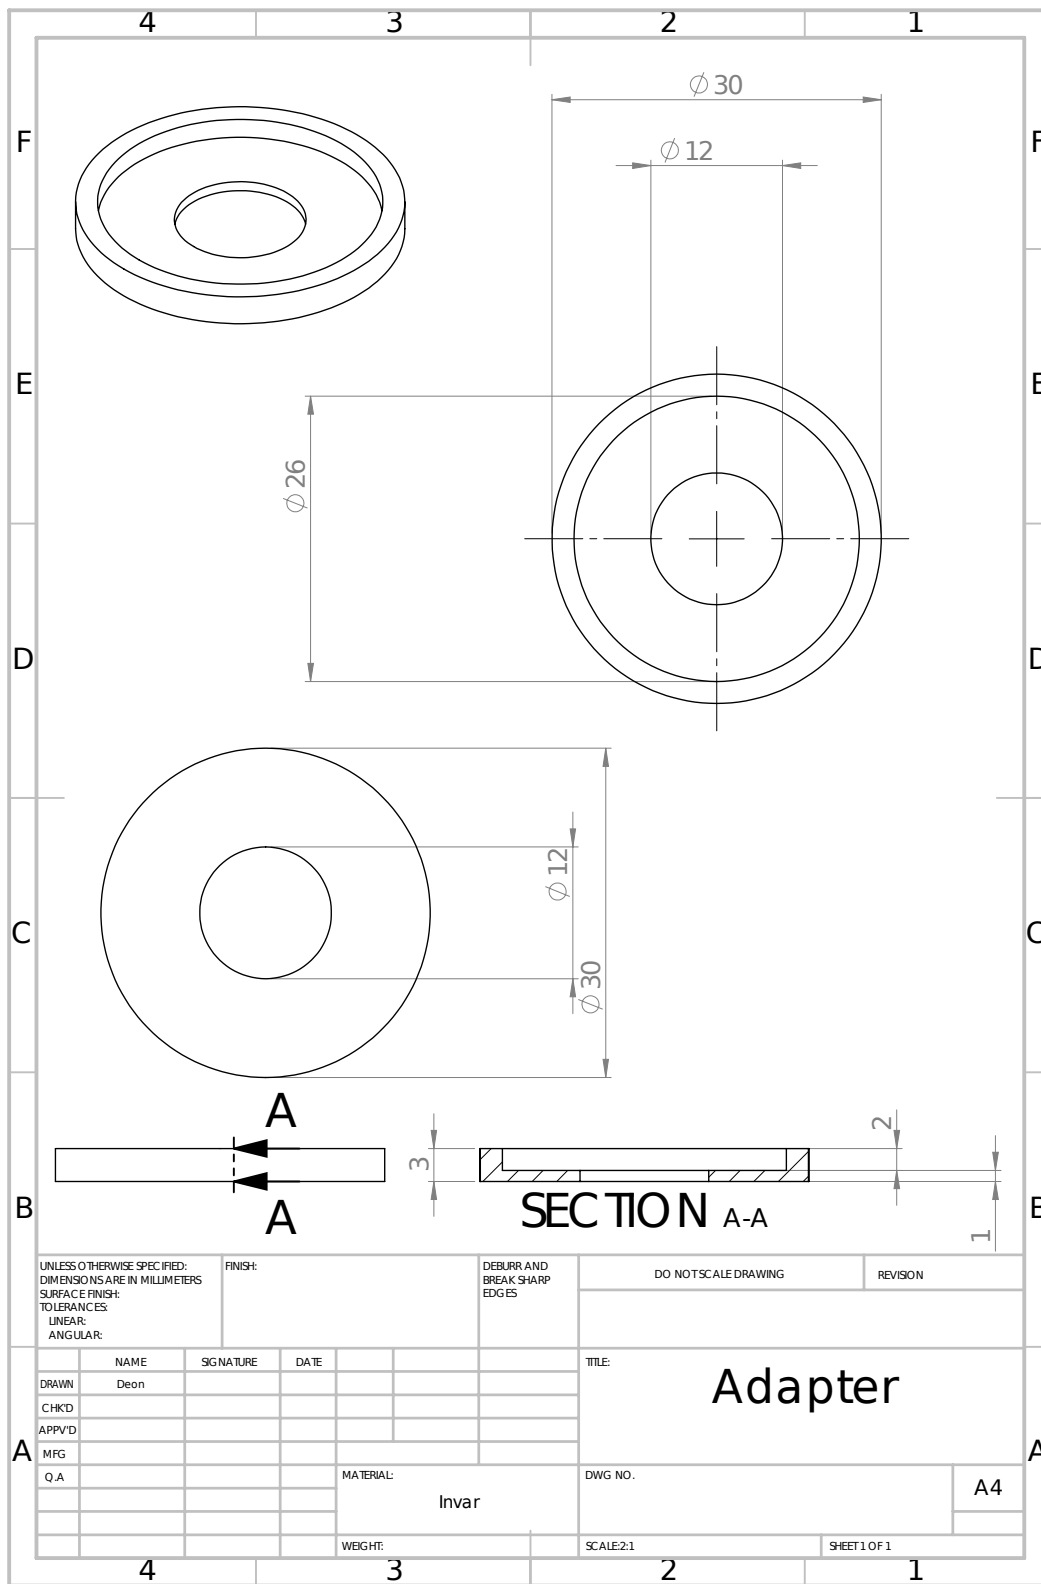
Drawing of Invar adapter for gluing mirror to piezo for the tunable cavity
